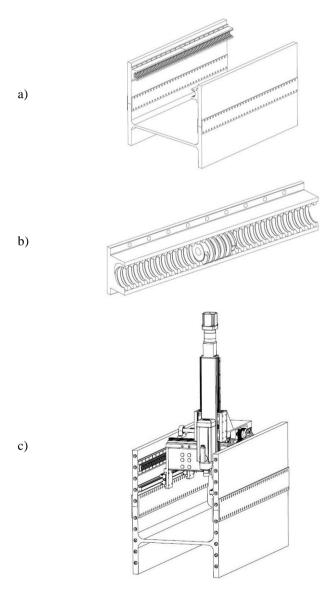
a) Modular bed structure with two racks; b) screw-rack geometry; c) bed structure hosting one moving cross-table
